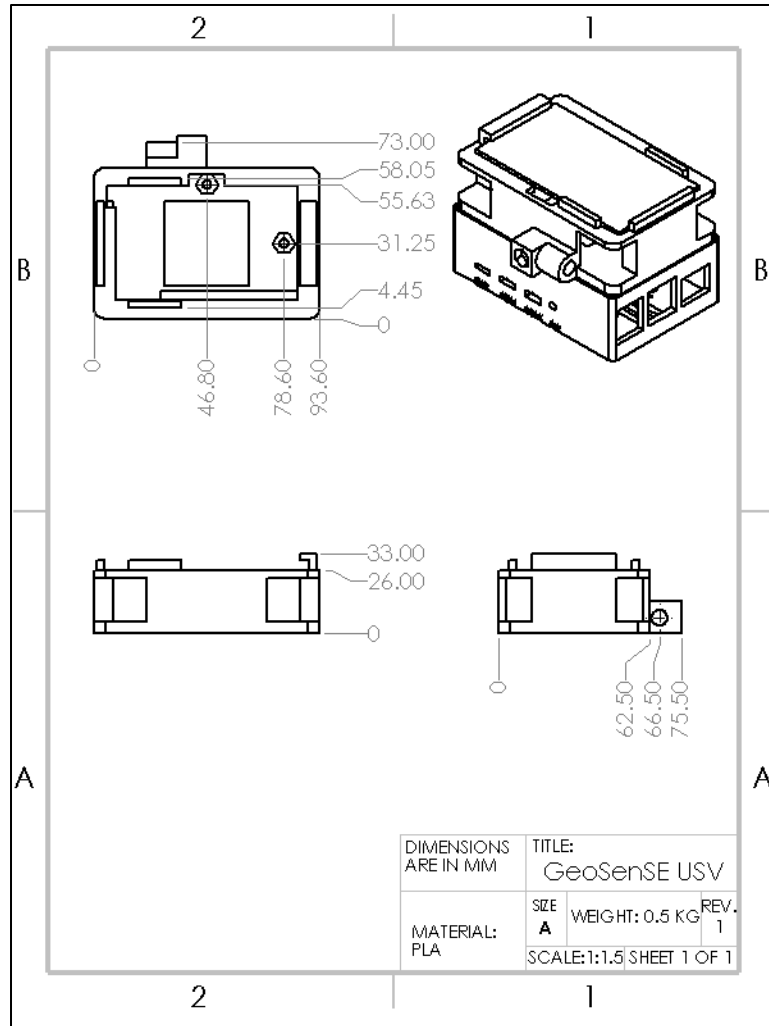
Sensor Integration Module Technical Drawing (PCB – Raspberry Pi 4).
